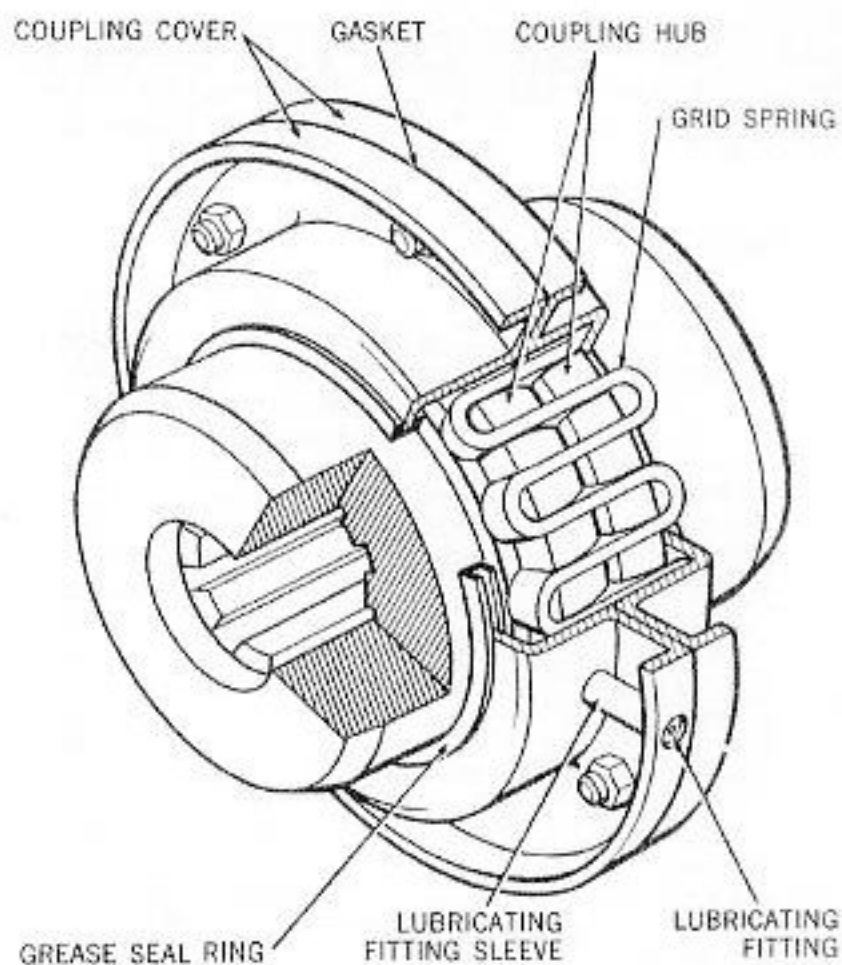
Projectile Ring Drive Motor to A-end Coupling, Cutaway View
